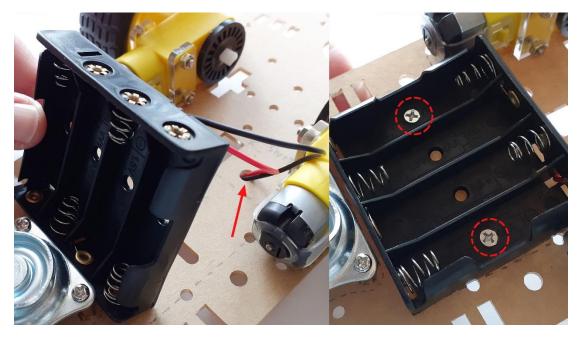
Placing the battery holder; Left: passing the cables through an existing hole; Right: binding the holder
